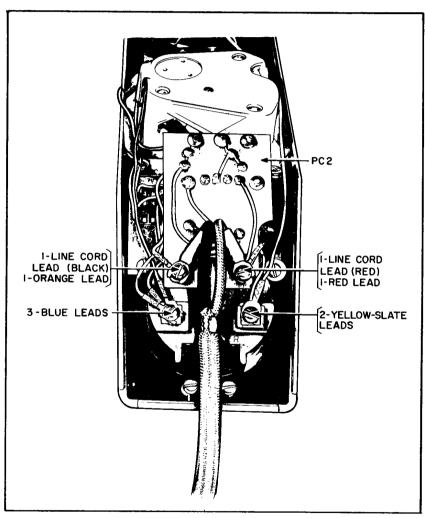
QSE4 Type handset—Cover Removed—Showing Connection of Line Cord and Assembly of PC2 (P0500416) For Conversion Purposes
